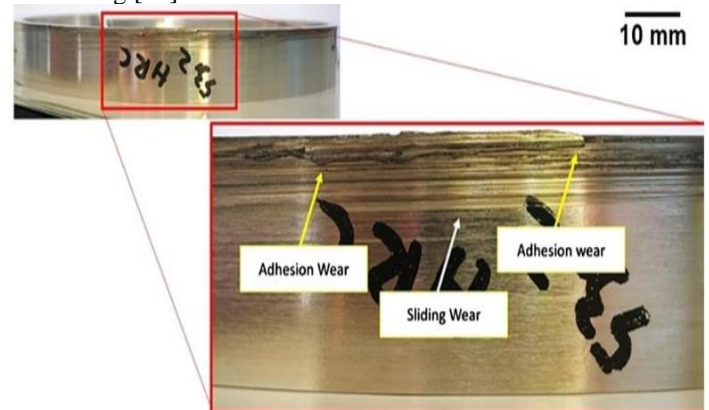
Defects on outer surface of wear ring impeller [1]
